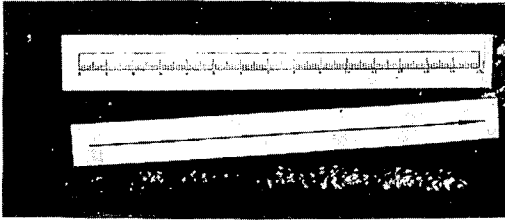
Photograph of fillet weldment after tracking weld line (offset angle = 50, welding speed = 4(mm/sec), weave length = 4(mm), weaving time = 0.3(sec), dwell time = 0.12(sec))
